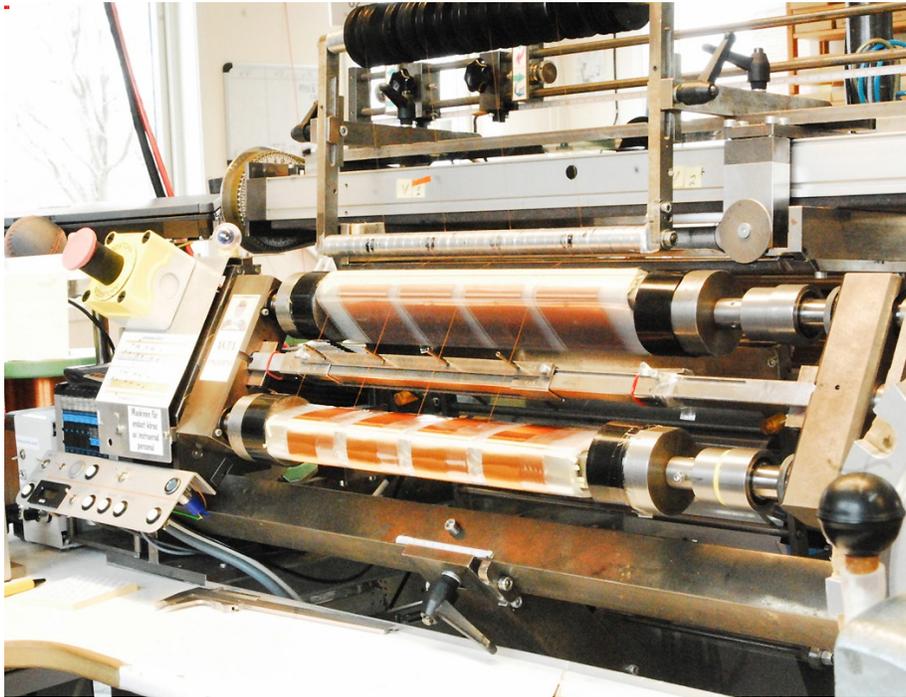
Front view of a Lundahl coil-winding machine for larger format transformers.
